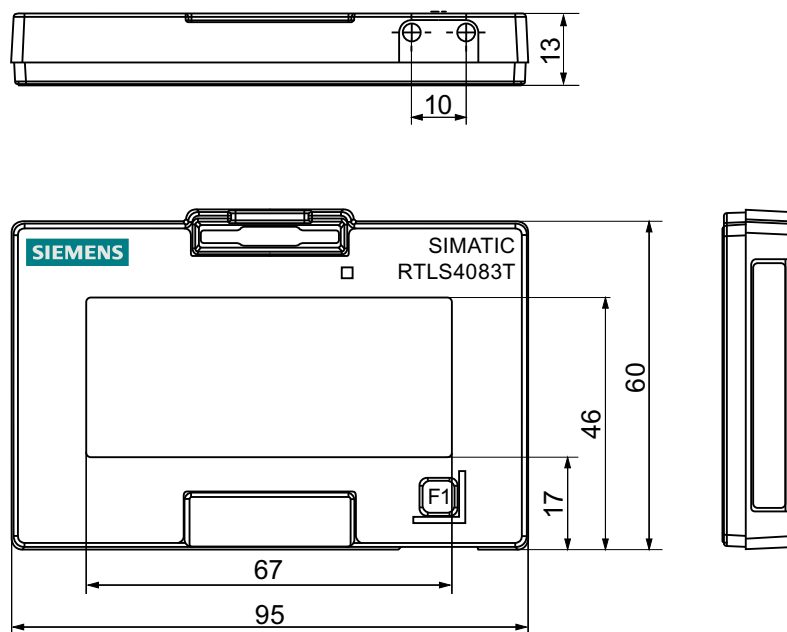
Dimension drawing SIMATIC RTL4083T - All dimensions specified in millimeters
